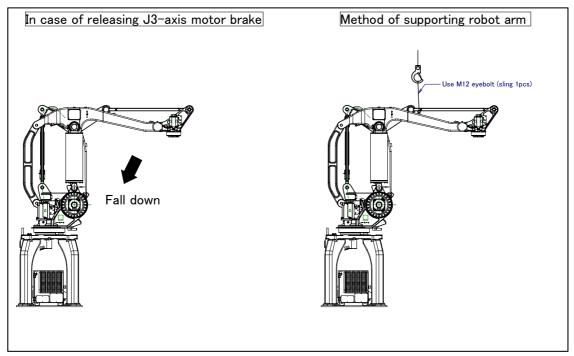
(b) Arm operation by the release of J3-axis motor brake and measure
